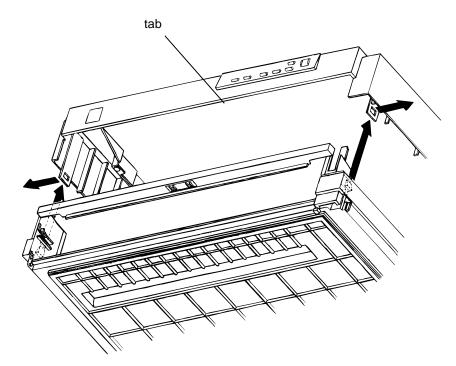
Releasing the Upper Housing Assembly Hooks and Tab
